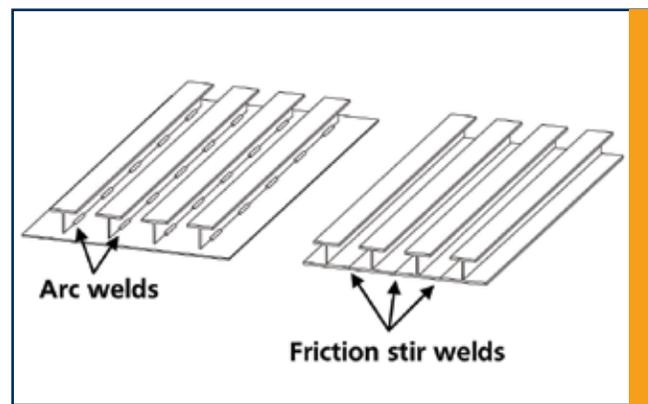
Sketch of arc welded construction vs. stir welded construction.
